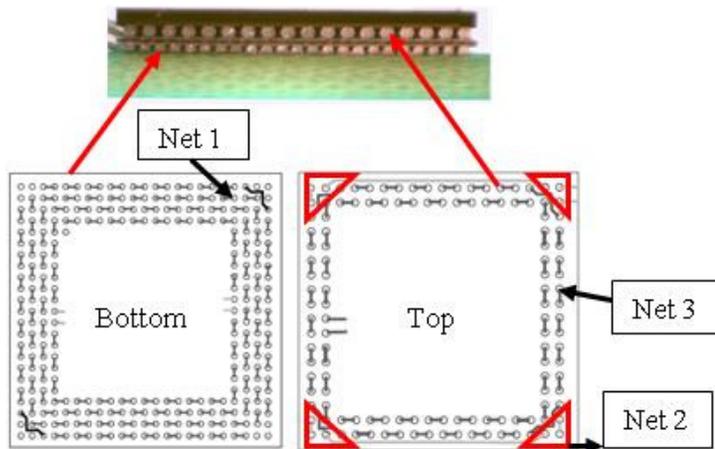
X-ray and daisy chain layout of 305 IO BGA package
